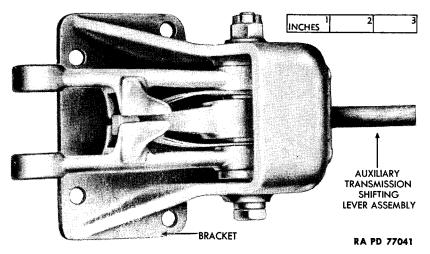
Auxiliary Transmission Shifting Lever Assembly
